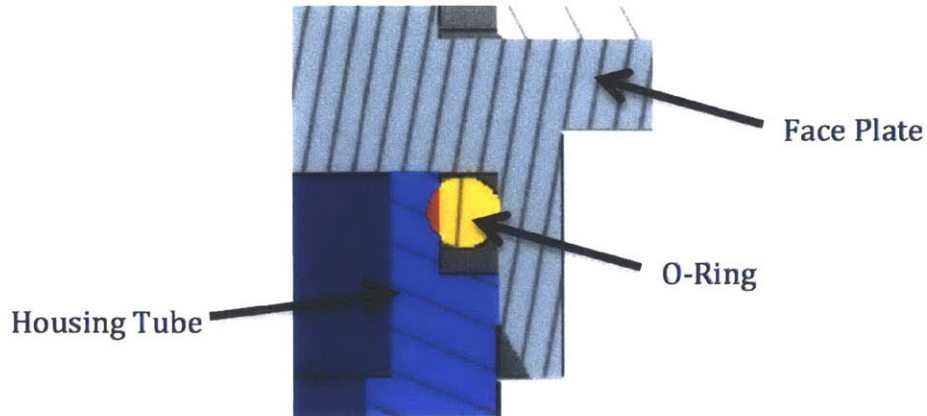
Cross-Section of O-ring Junction Between Face Plate and Housing Tube
